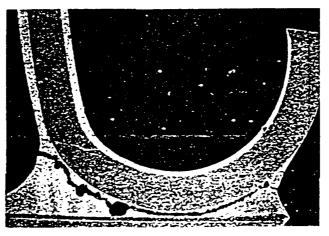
Fatigue Crack in a J-Lead Solder Joint
